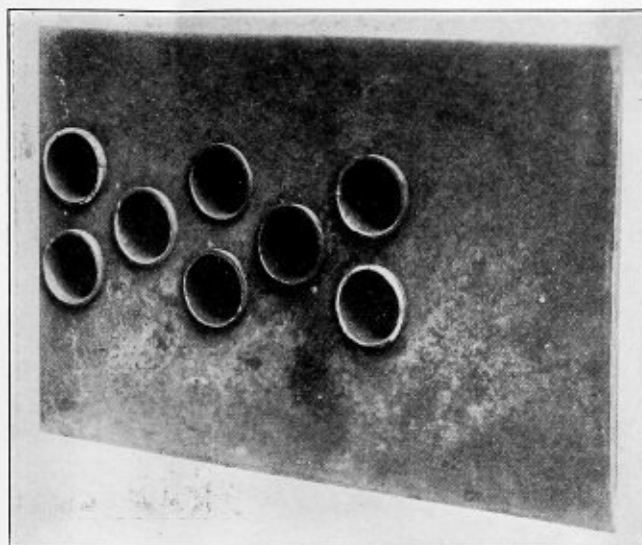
Small Section of Locomotive Flue Sheet, Tubes in Place and Ready for Welding
